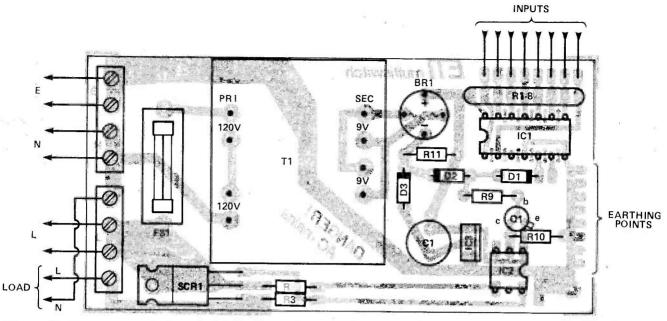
Overlay diagram of the thingummy. Note that R11 gets a little warm and should be mounted standing slightly proud of the board.
